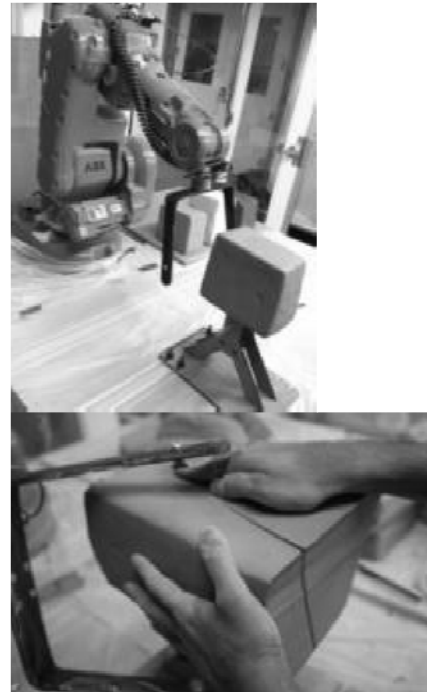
Robotic fabrication of ruled-geometry ceramic components through a wire-cutting tool
